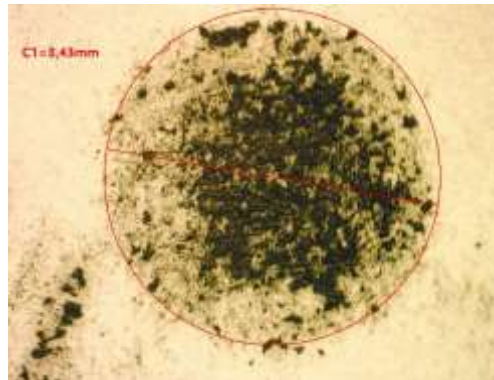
The measurement of the electrode diameter for the 20th weld.
